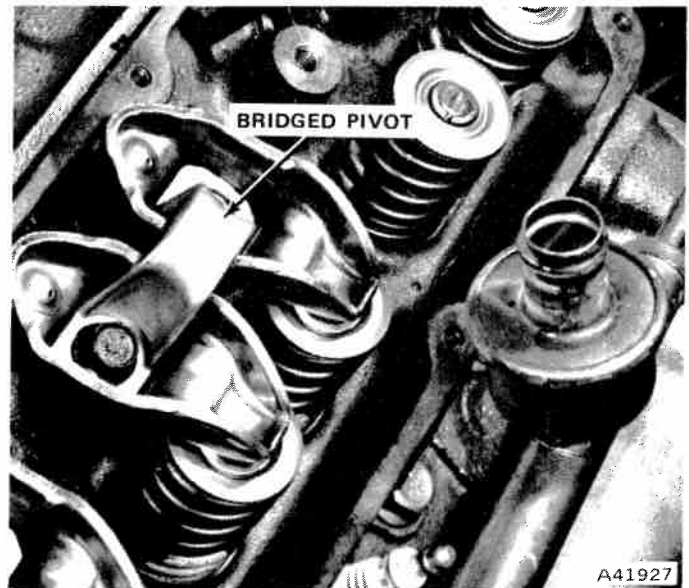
B-8 Rocker Arm Assembly—V-8 Engine
